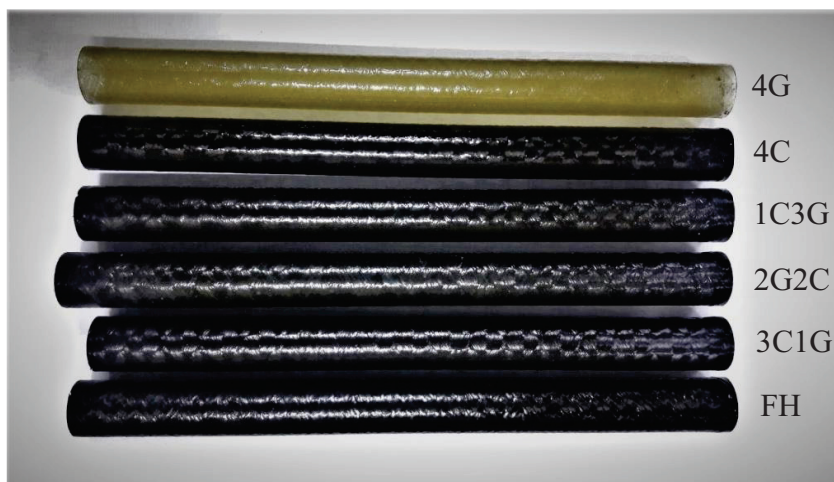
Manufactured composite tubes by using filament winding technique (G: glass, C: carbon, FH: filament hybrid)
